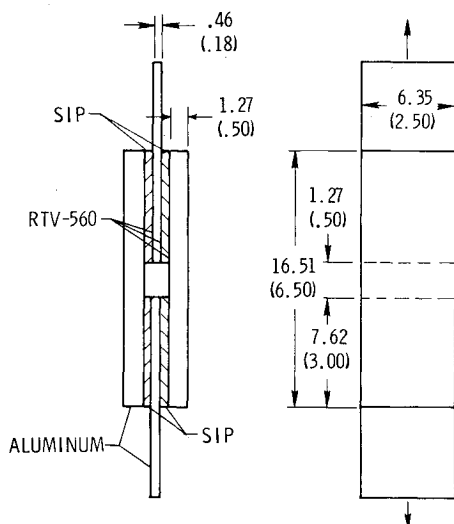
Double lap joint SIP shear test specimen. Dimensions given in cm (in.).
